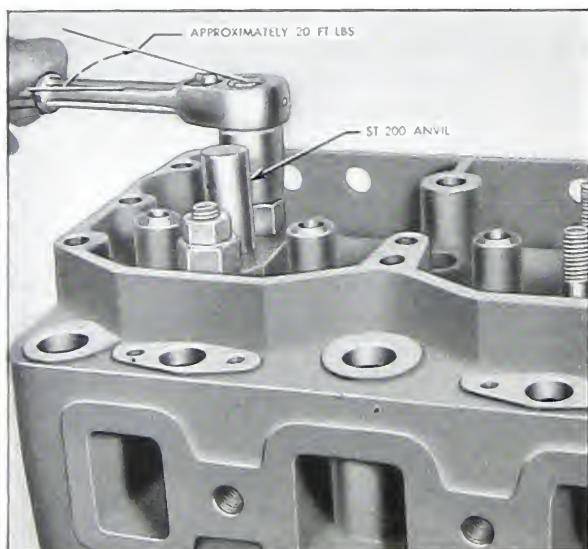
Sealing lower end of the injector sleeve "A"
